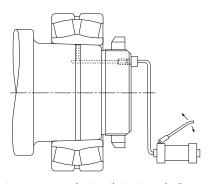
Removal Using Oil Injection Hydraulic Pump
